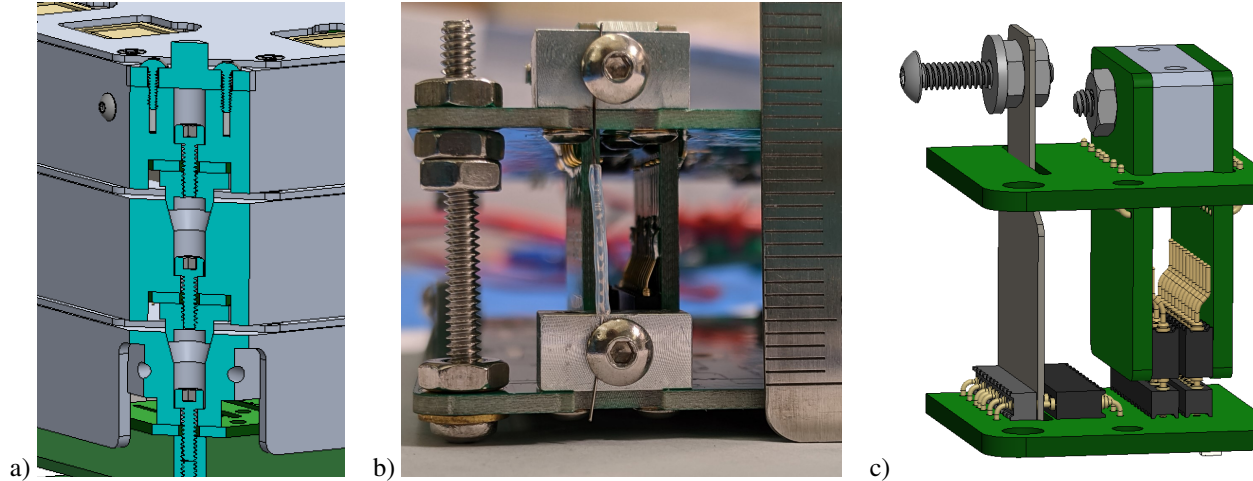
Hold-down and release mechanism details. a) Cutaway view of the conical mating surfaces between stages; the voids house the separation springs (not shown). b) Hold-down wire after fusing with stainless steel and PTFE sleeves to control location. c) View of the interstage connectors and interrupter.
